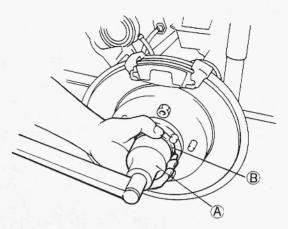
Special Tool (A) (Front Wheel Bearing Nut Socket Wrench 09941-58010) Special Tool (B) (Automatic Free Wheeling Hub Socket 09944-98010)
